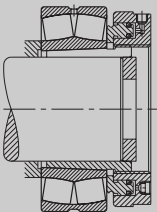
Dismounting of Withdrawal Sleeve by using Hydraulic Nuts
